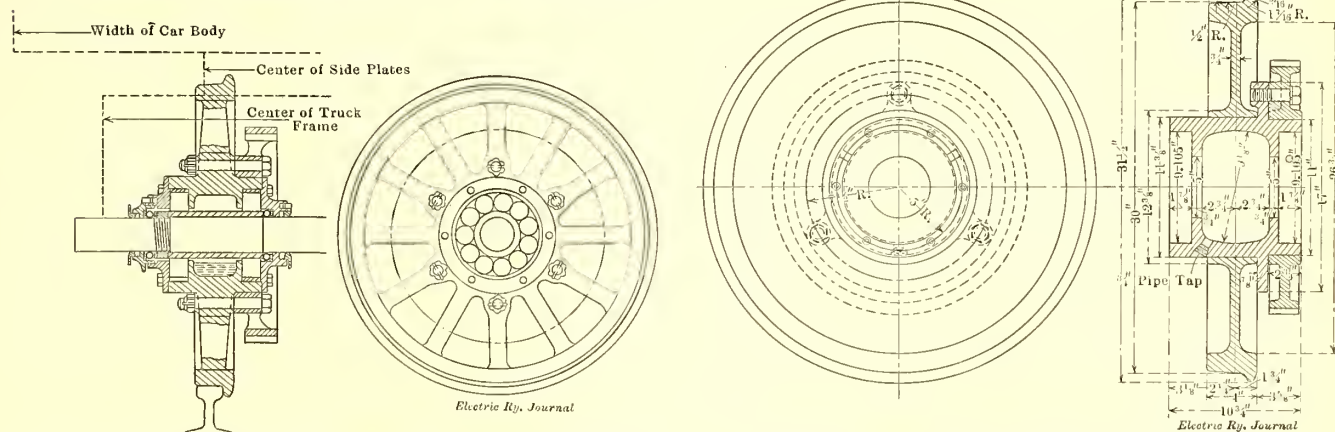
Roller-Bearing Car Wheel with Extended Axle
